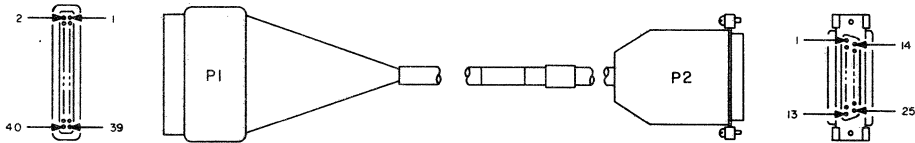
Scanner IIE/CA Direct Connect Cable Assembly 2814087
